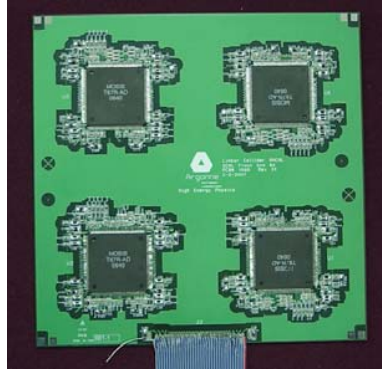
Gaseous HCAL: Photograph of a pad board equipped with 4 ASICs
